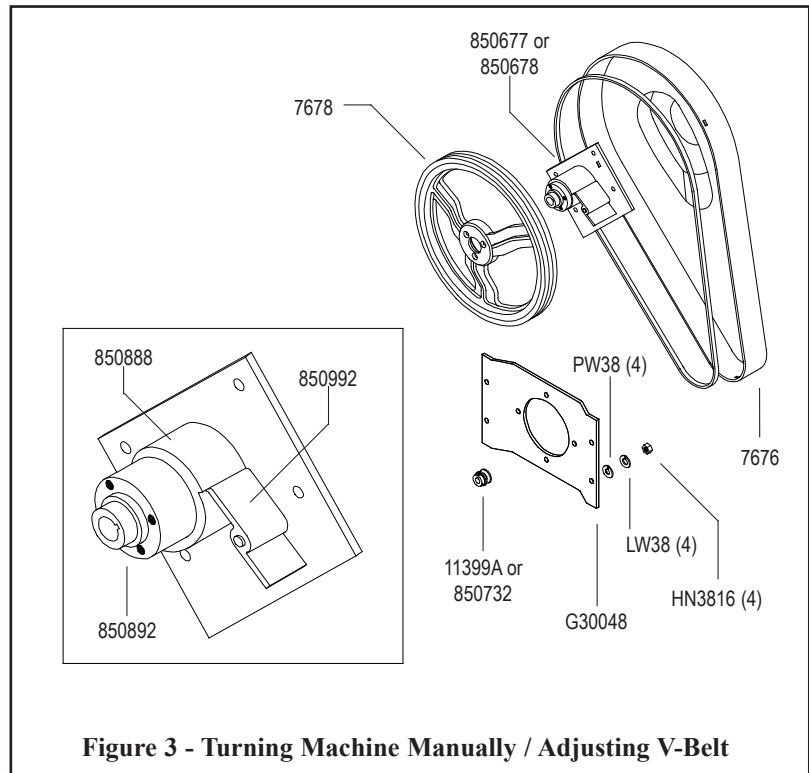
Turning Machine Manually / Adjusting V-Belt
